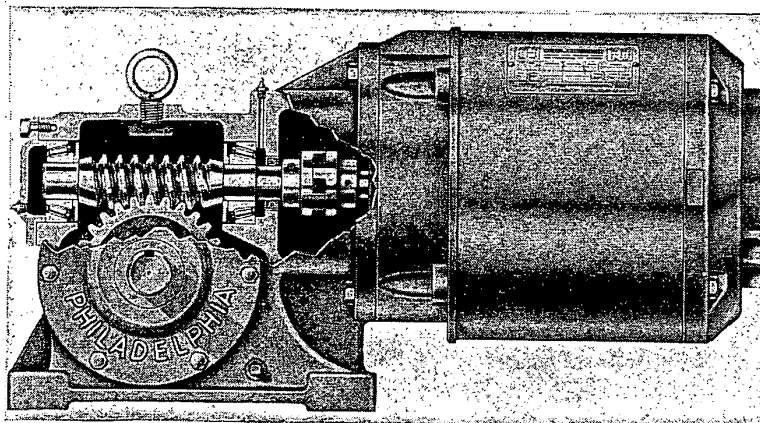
Motor with wormgear speed reducer. (Courtesy of Philadelphia Gear Corp.)
